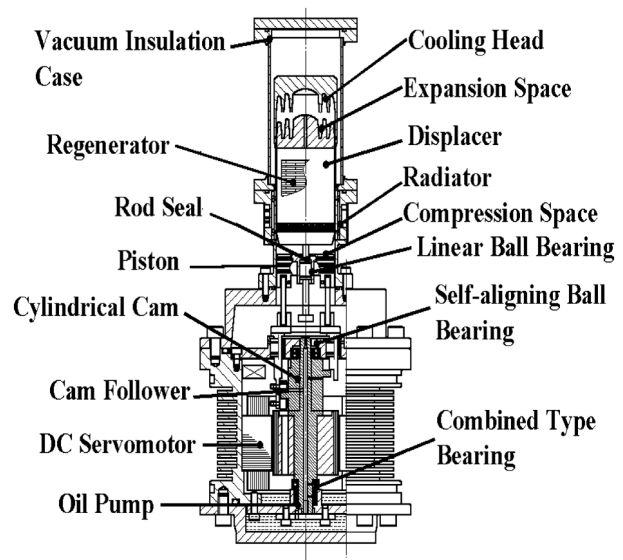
Schematic View of The Cylindrical Cam Type Stirling refrigerator
